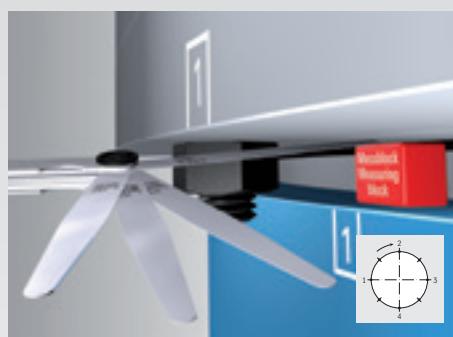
Basic setup for measuring the axial reduction with a feeler gauge
